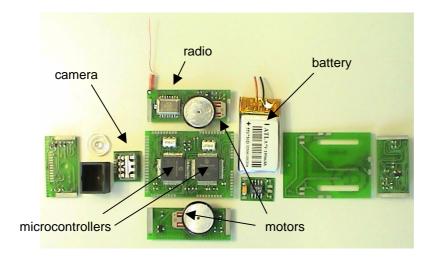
The robot before the final assembly. The 9 PCB seen from inside the robot.
